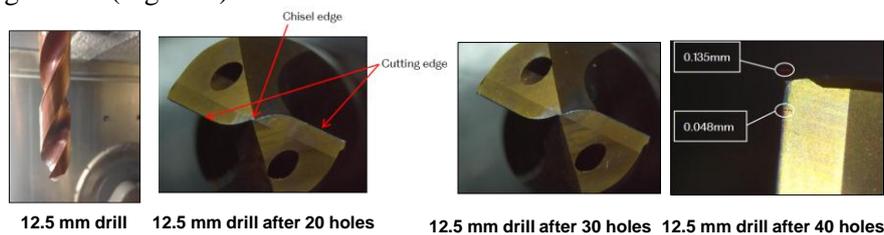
Drill tool edge condition after 20th, 30th and 40th hole
